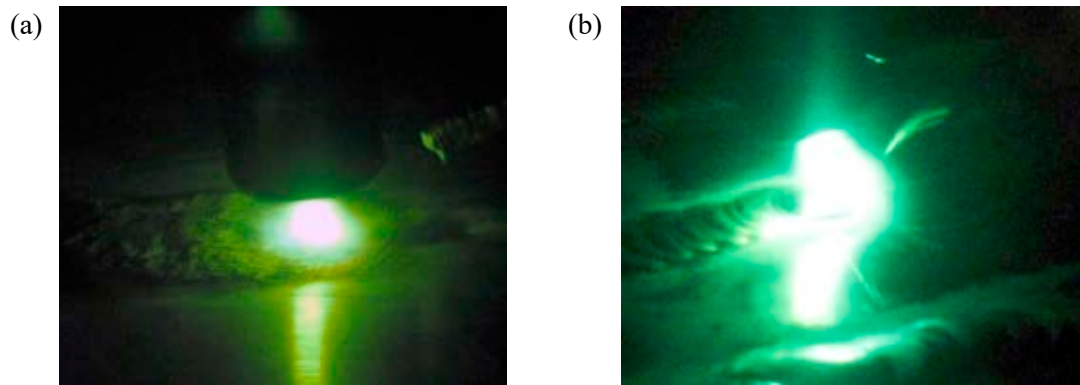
View of the weld pool: (a) composite AlSi9/SiC/20(p) and filling material AlMg5Sc0.61 and (b) alloy 6061 filling material ER5356 (Wysocki, 2009)
